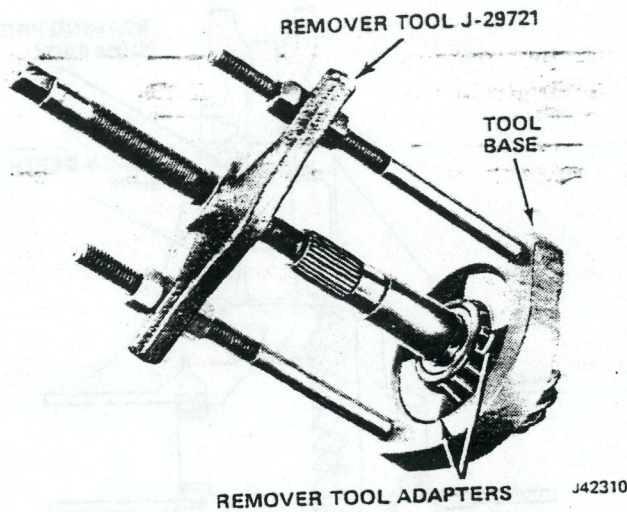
F-49 Pinion Rear Bearing Removal—Model 30-44 Axle
